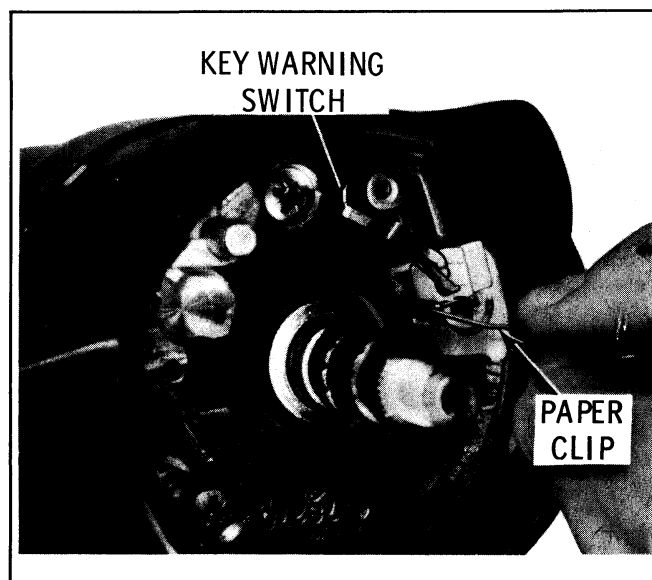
B-71—Removing Ignition Key Warning Buzzer Switch
